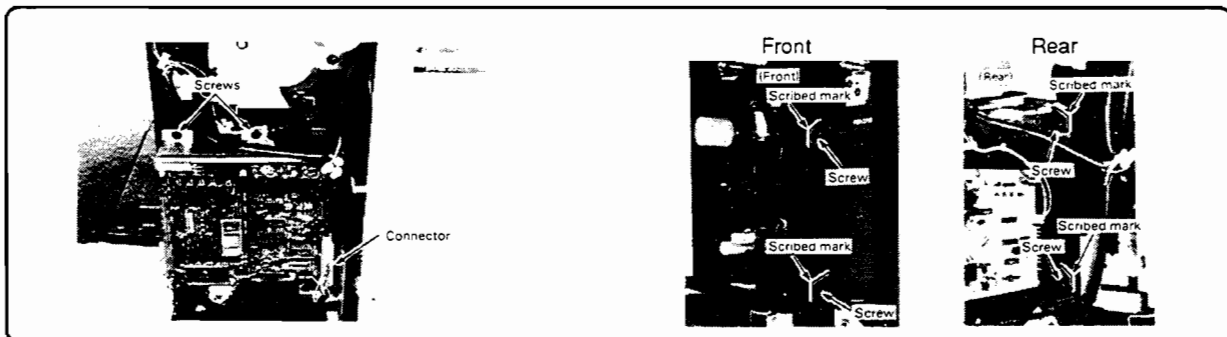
Removing PDDU PCA and Marking PDX Position
